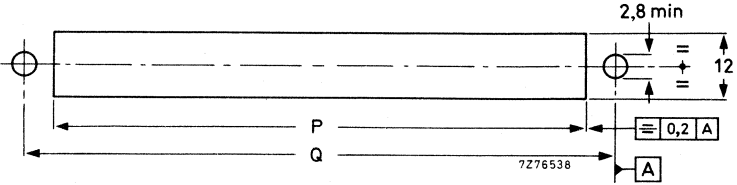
Panel cut-out for the male part; see Table 4 for dimensions P and Q.
